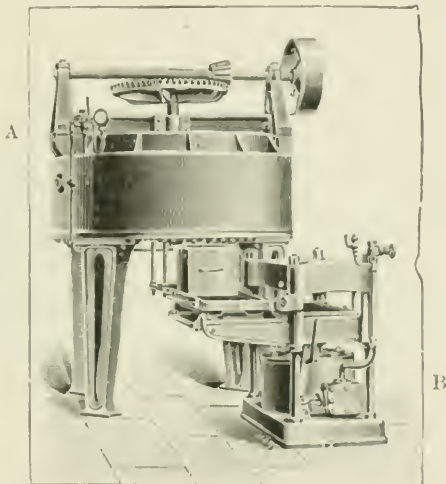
A, STEAM KETTLE; B, MOULDING MACHINE.
